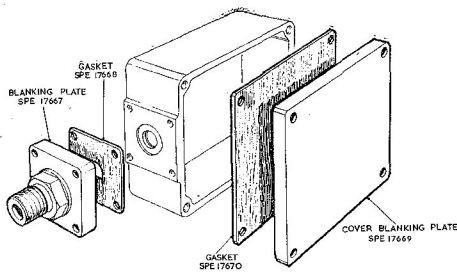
Tools for pressure testing the suppressor box/mounting plate joint
